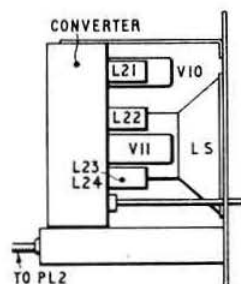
A sideview of the receiver chassis showing the mounting of the converter unit and the arrangement of the tuning drive.
